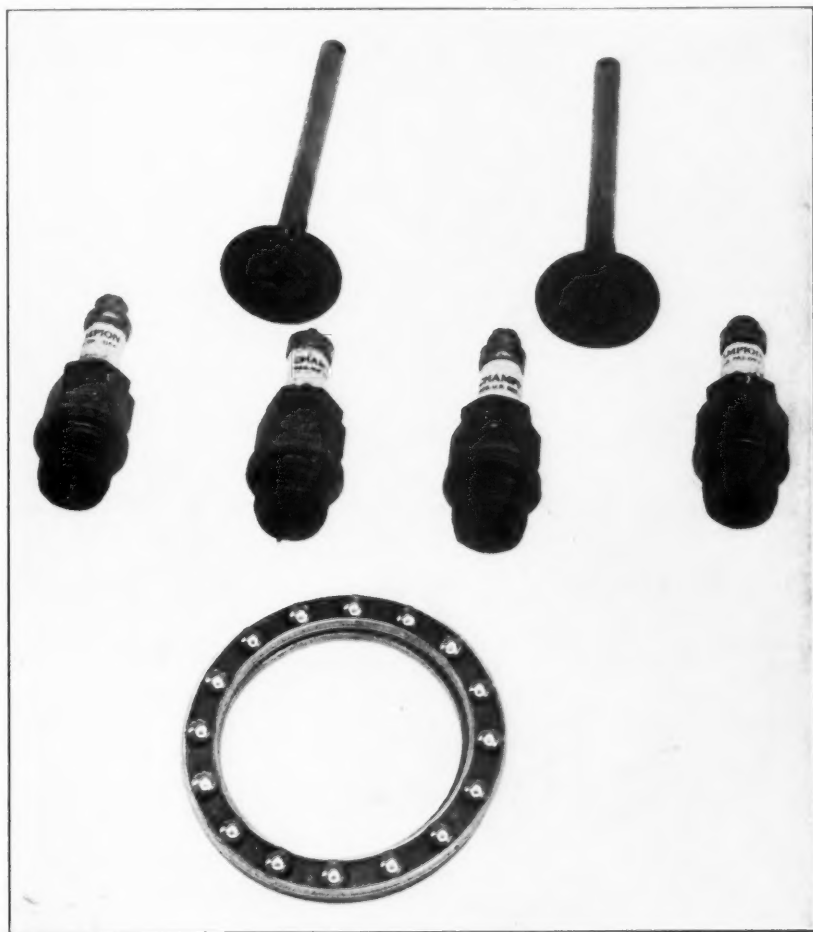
Clutch Thrust Bearing, Valves and Spark Plugs
